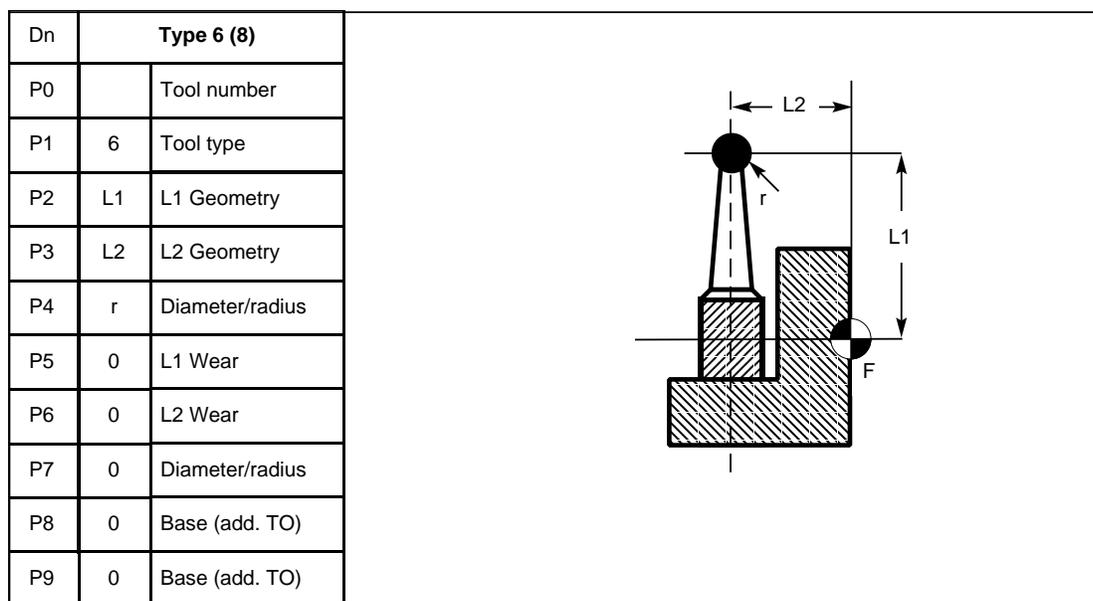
Workpiece probe type 6 (8) in the TOA memory for turning machines
